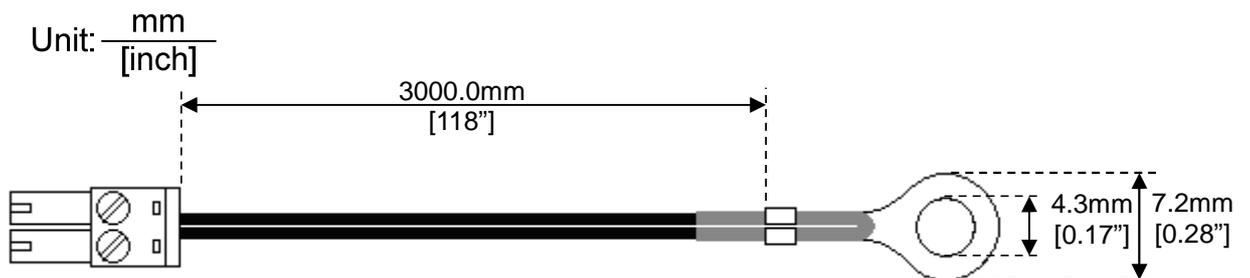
Temperature Sensor (TES) Dimension Drawing
